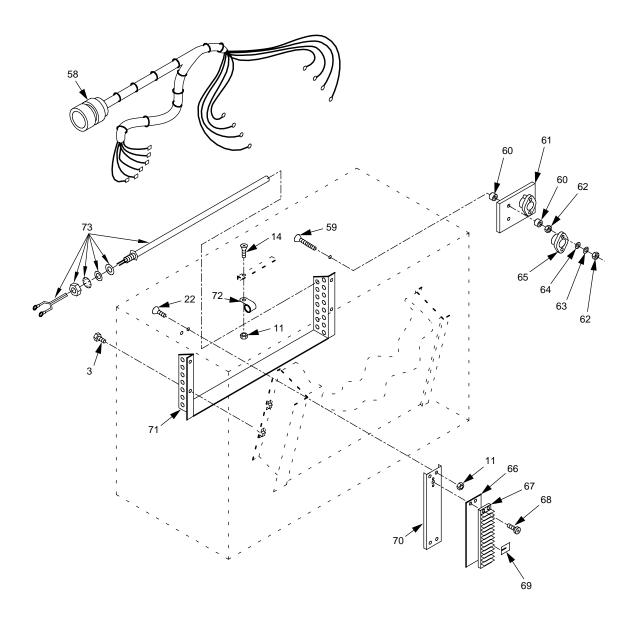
Evaporator Assembly (Sheet 4 of 4)
